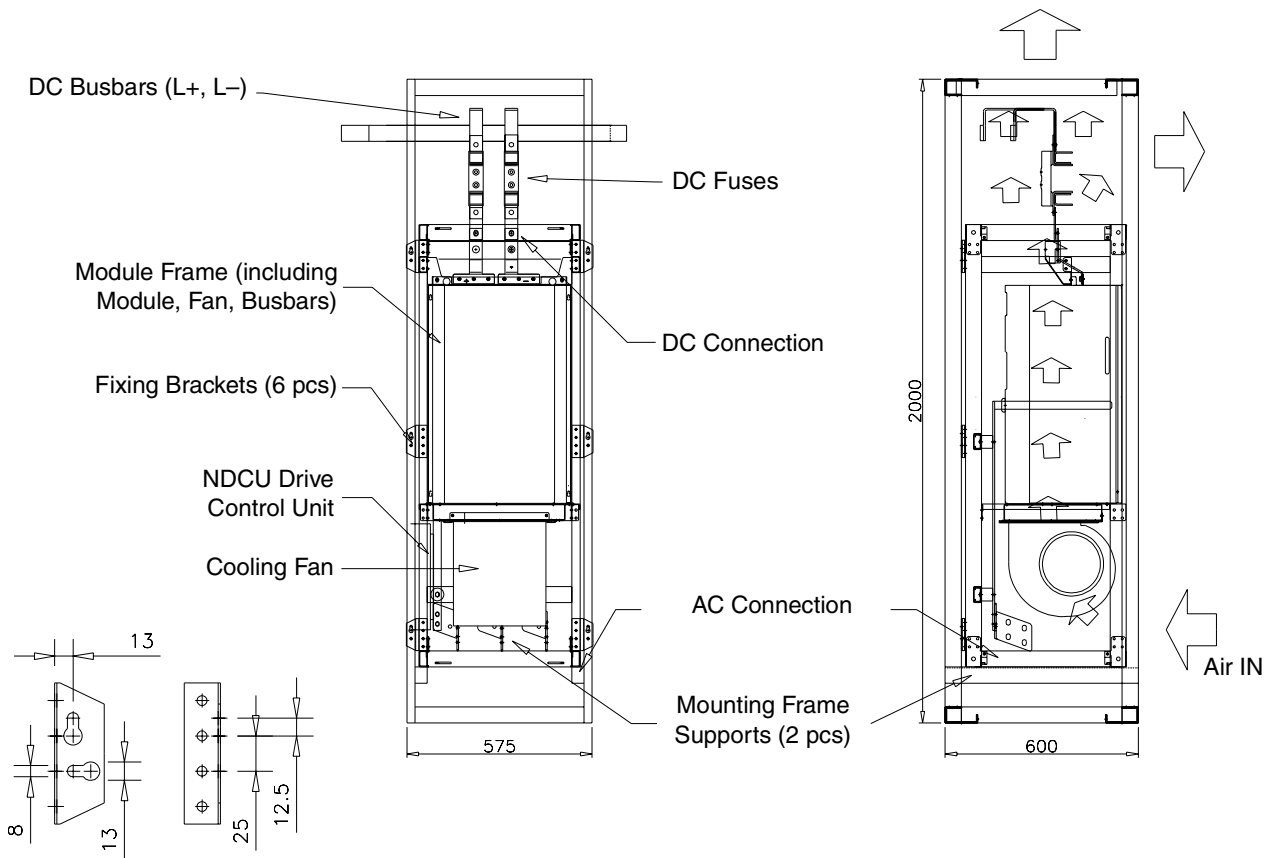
Cabinet layout example for R8i and R9i modules – Installation using the mounting frame.
